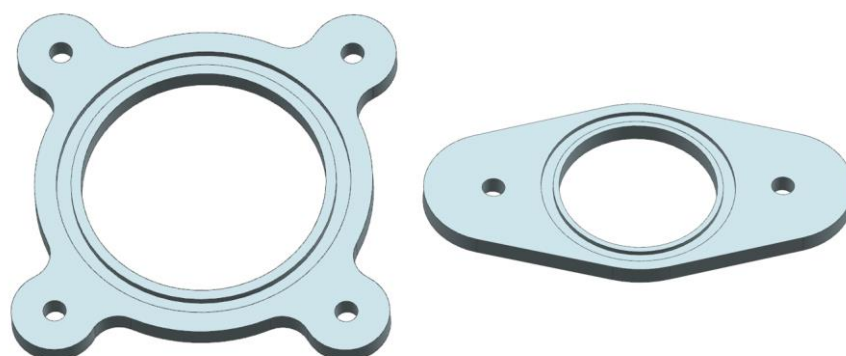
ETB (left) and diffuser (right) flanges. Note the O-ring grooves
